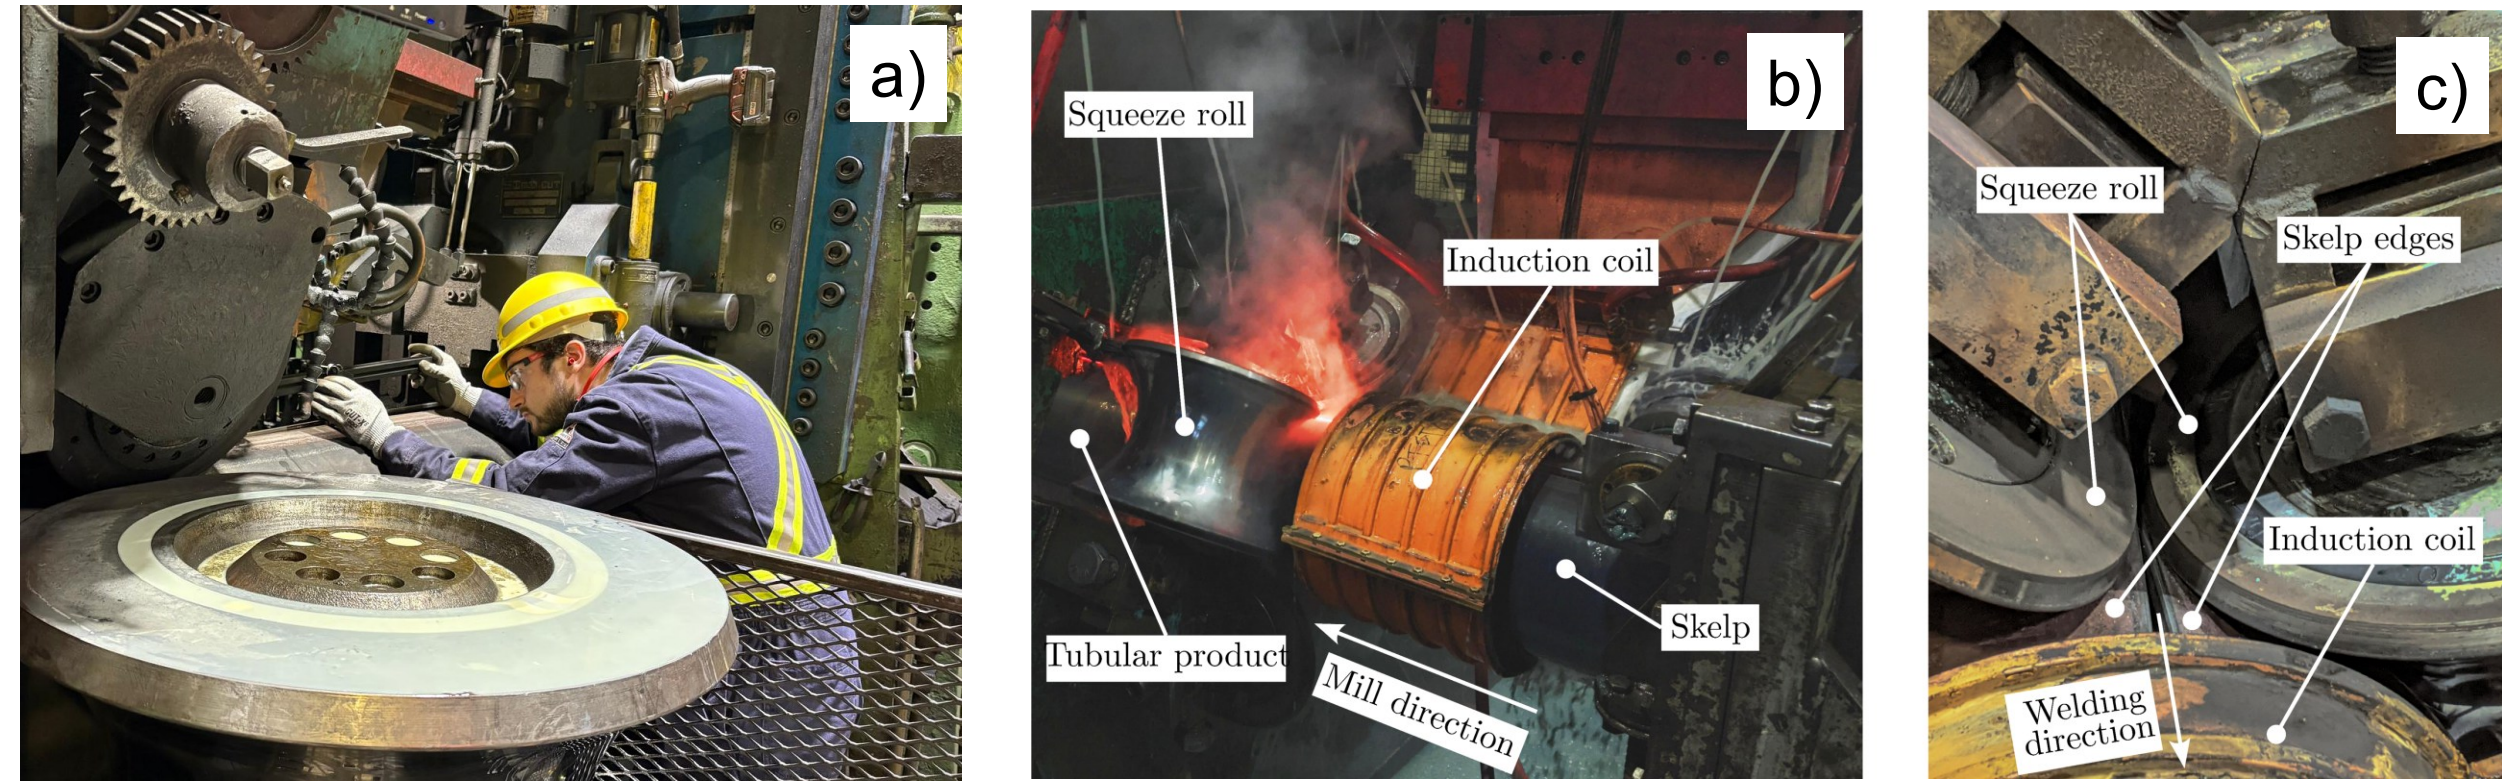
A full-scale HFW weld box configuration on an induction pipe mill. (b) The mill in operation (on-state) welding skelp from right to left. (c) The mill in a static (off-state) condition, clearly showing the convergent "vee" geometry formed by the skelp edges prior to the point of welding.
